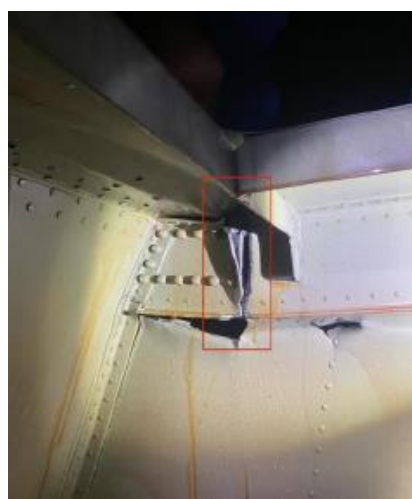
The left hand inboard AFT stiffener (ARM-PANEL-#6 BULKHEAD, PN: 13A01427-022) of the number 6 bulkhead has been cracked
